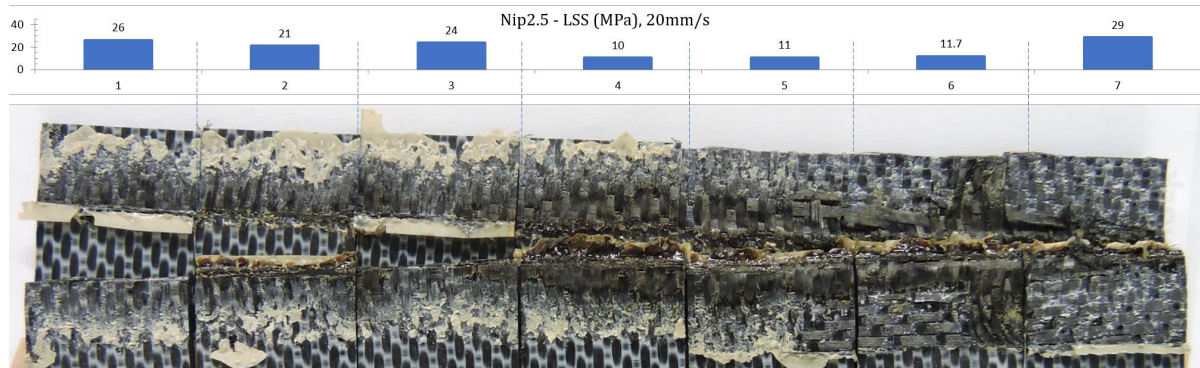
The fracture surfaces at a welding speed of 20mm/s
